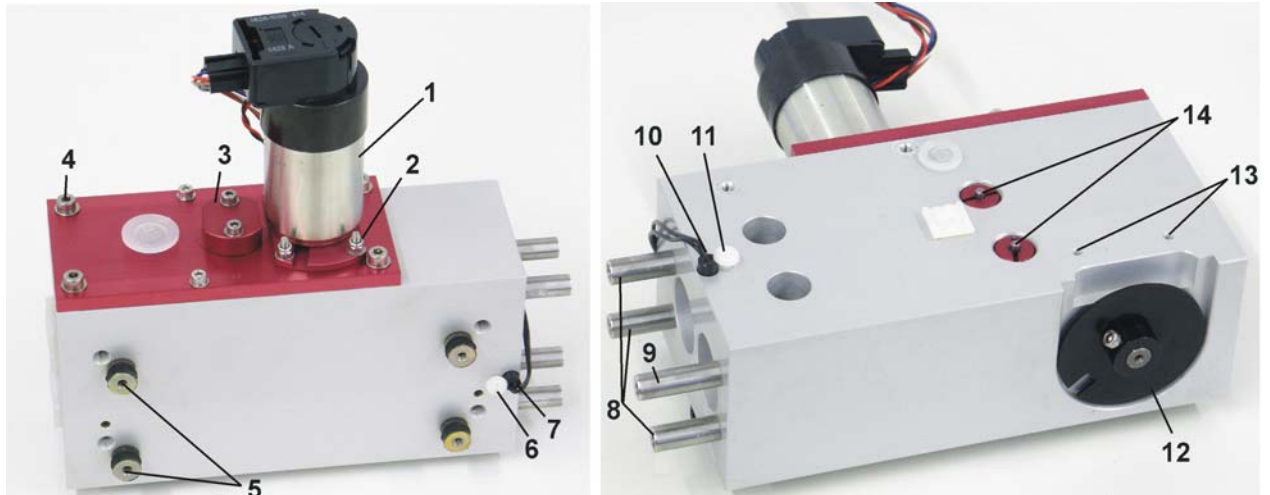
Motor/gear block. Left-side: bottom view, Right-side: top view. Note: motor assembly shown in example picture is a different model as used in the LC 100 pump.
